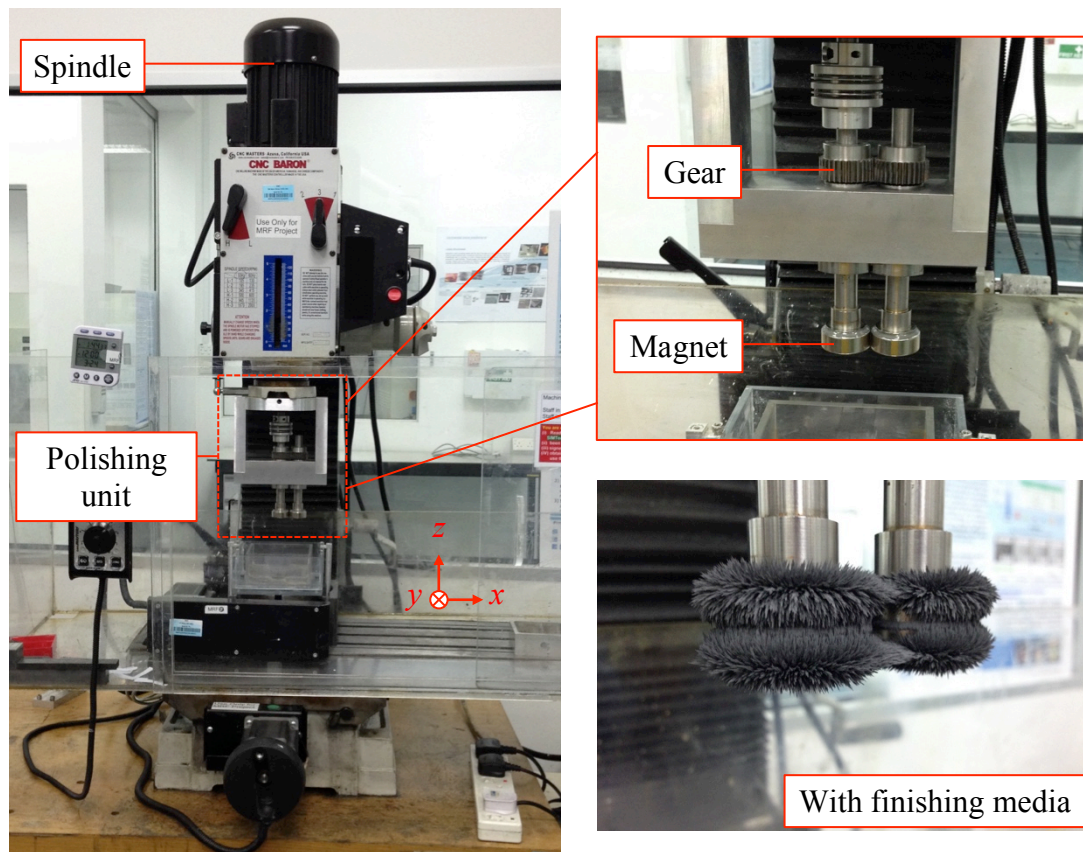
Prototype of the polishing unit mounted on a desktop milling machine.
